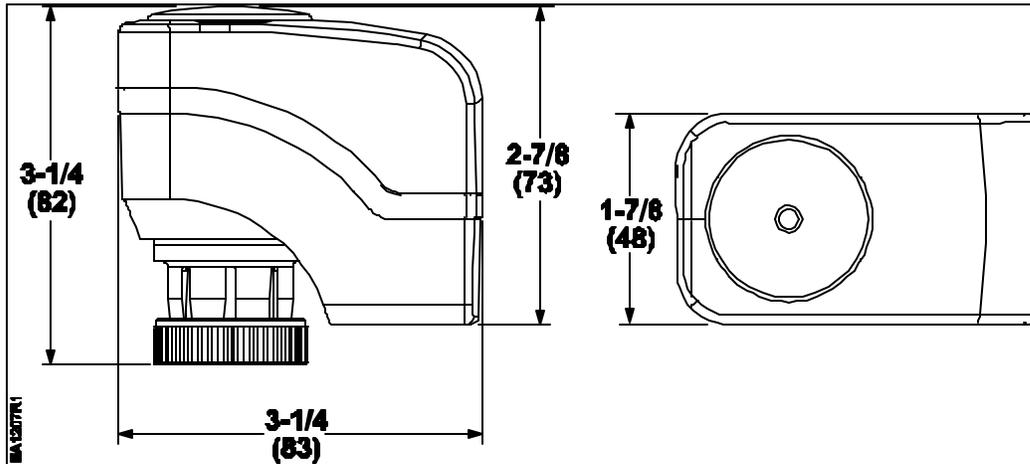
Dimensions of the SSA/P Series Actuator in Inches (mm).
